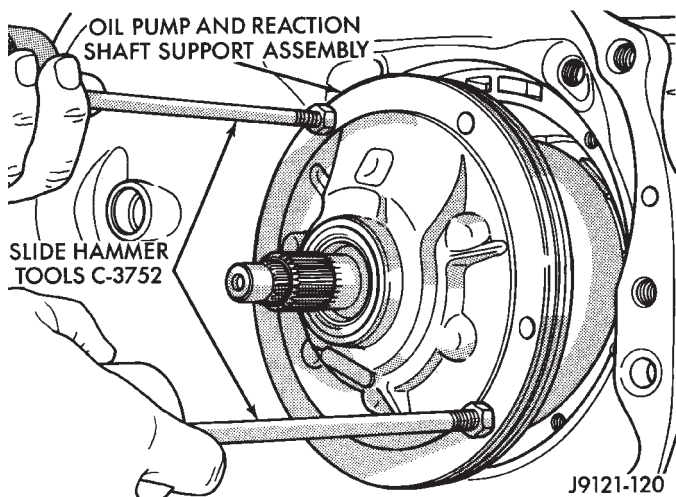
Removing Oil Pump And Reaction Shaft Support Assembly
